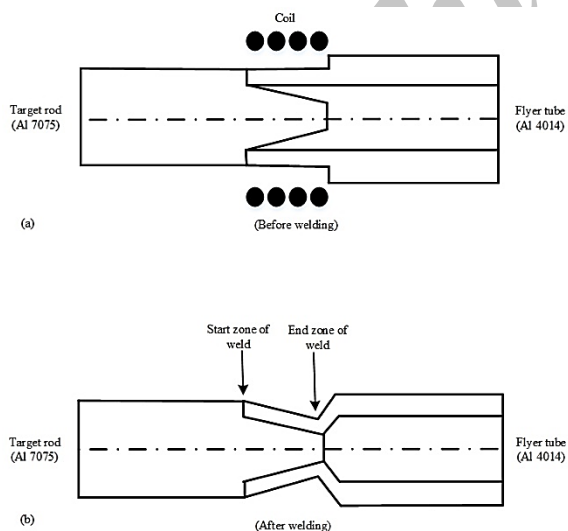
Schematic illustration of tube and rod position inside the coil. a) before welding and b) after welding
